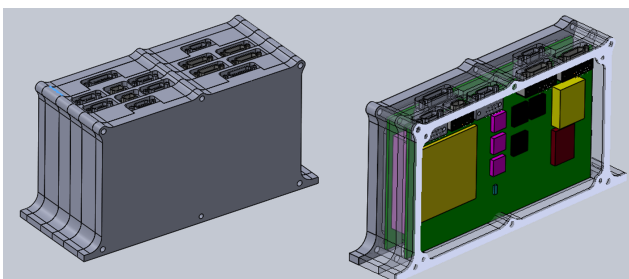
Vault electronics box assembly (left) consists of modular Power and CSM modules (right).
